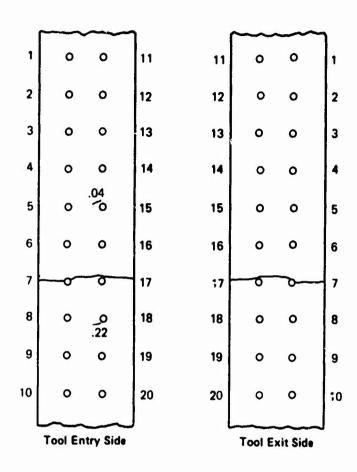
Fatigue Crack Initiation Sites in Usage Simulation Specimen No. 2A20 (Fig. 2, Load Transfer, Type I) Detected During Testing and After Disassembly
